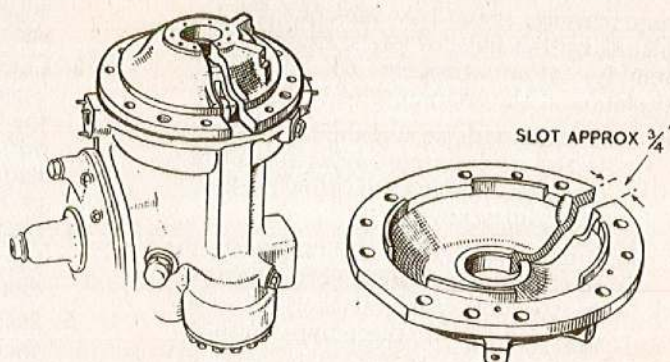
Clearance check of cam-plate and housing using slotted cam-plate housing
